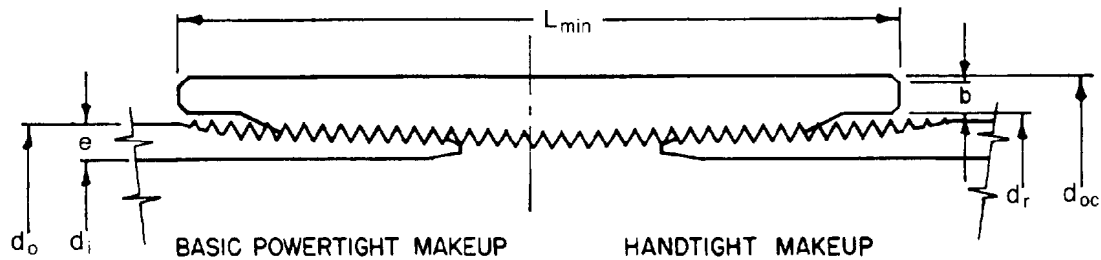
Line pipe and coupling. See Table 2.33 for pipe dimensions.
